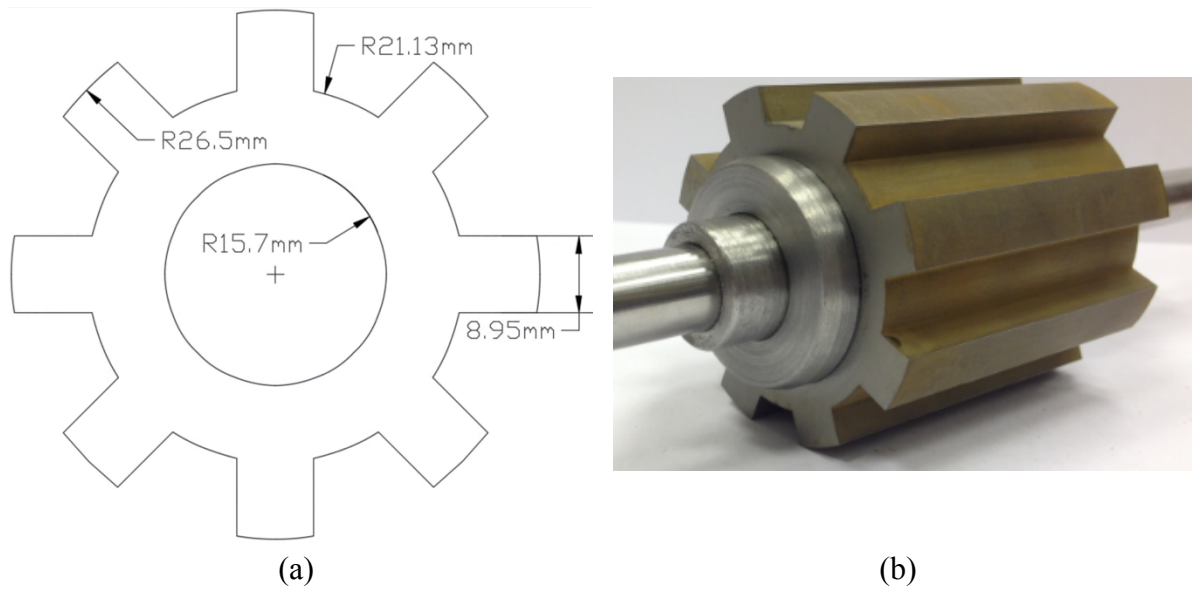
pole rotor of prototype SRMs/DSRMs. (a) Dimensional drawing, (b) 8-pole rotor.
